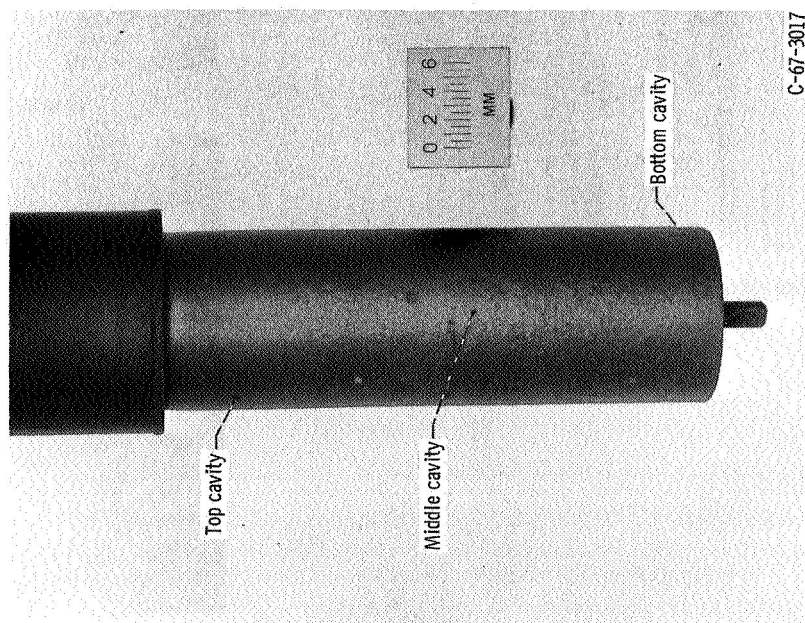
Location of cavities machined in vapor-deposited rhenium surface.
